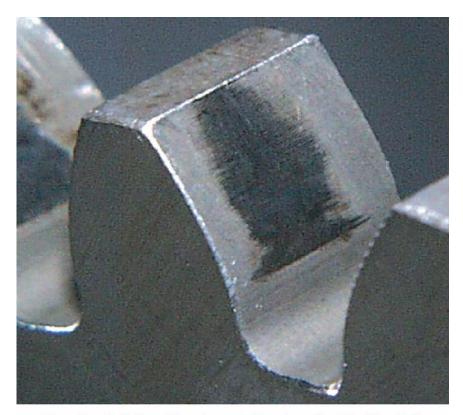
Typical condition of gear tooth surface after 7.6 million shaft revolutions at test speed and load.
